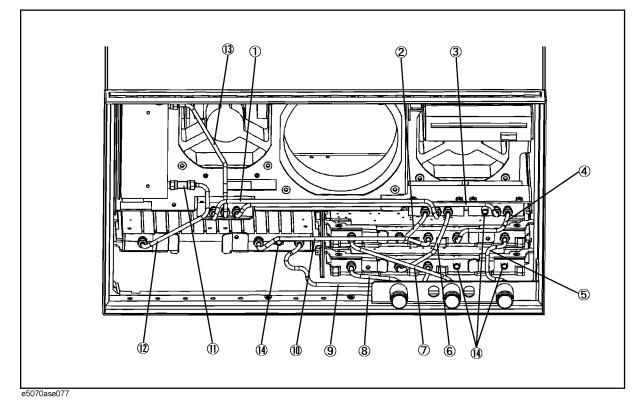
Front View (Semirigid Cables) (Opt. 314)
